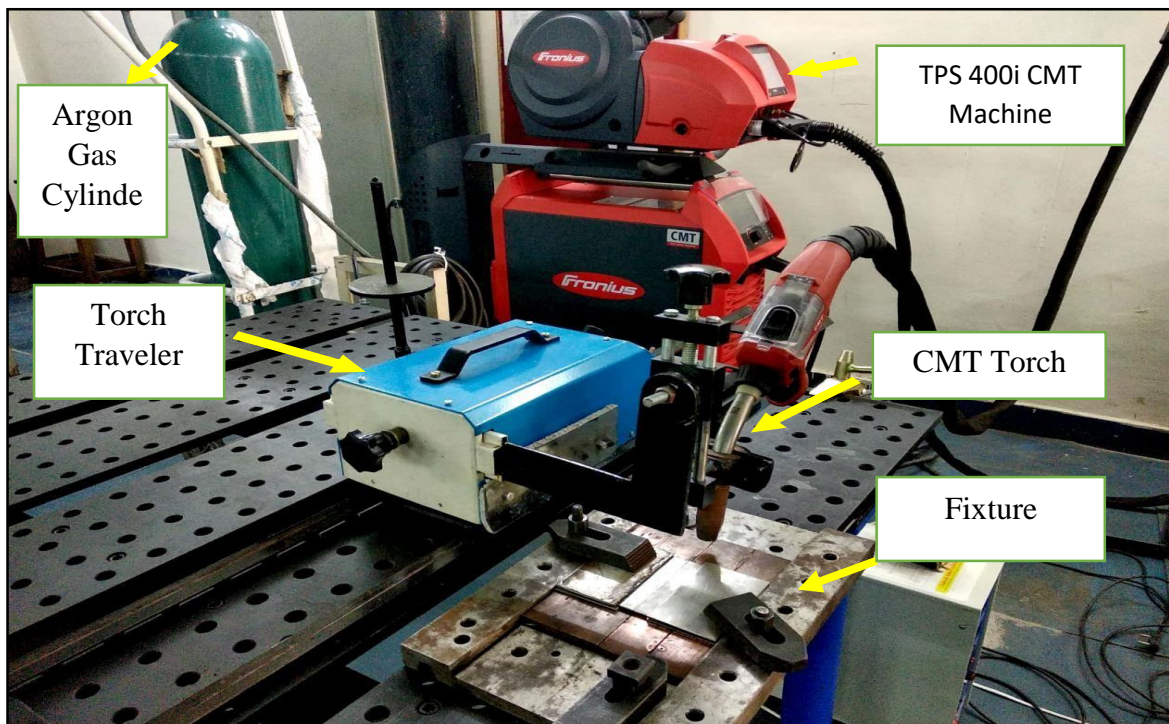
Experimental Setup for CMT Welding Process
